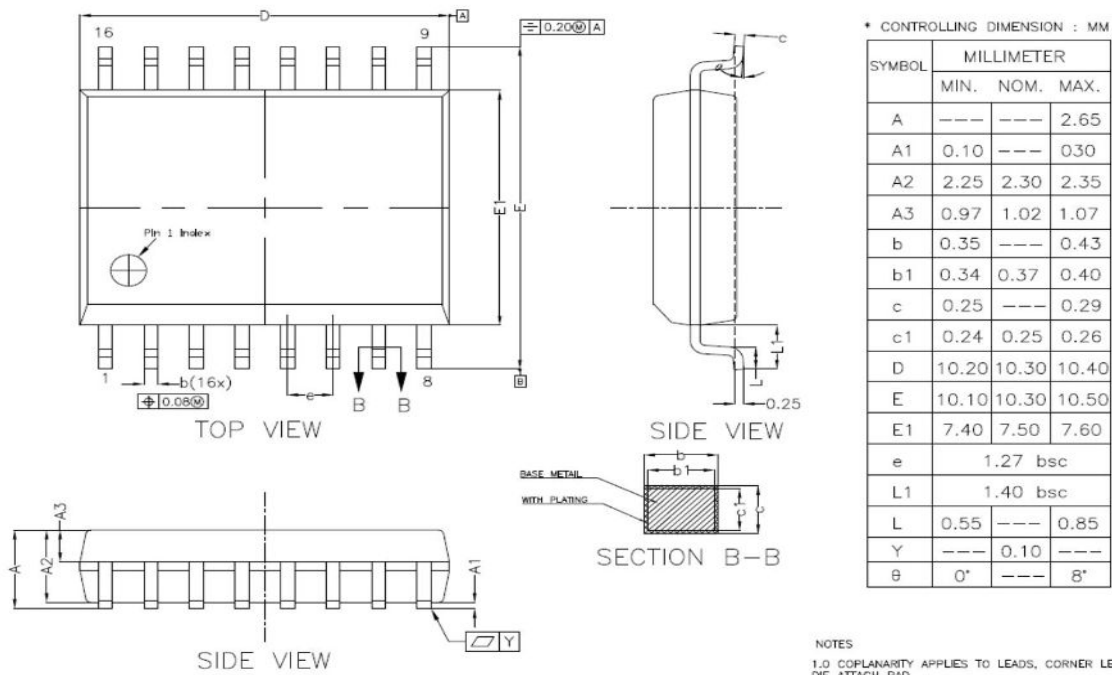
SOW16 Package Shape and Dimension in millimeters
